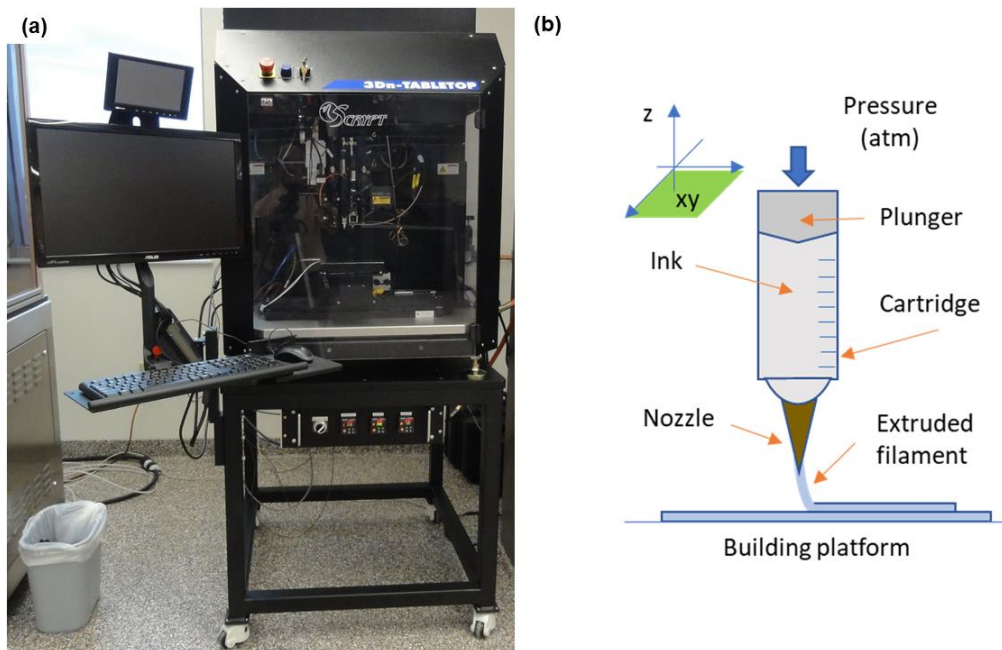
9. a) Tabletop-3Dn printer; b) schematic of the operating principle of a robocasting machine.
